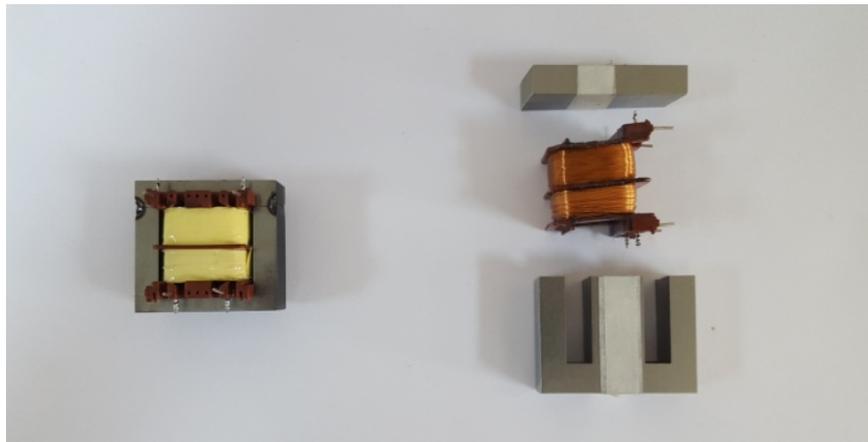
Welded, varnished and without welded, unvarnished, disassembled transformers from the same production line.
